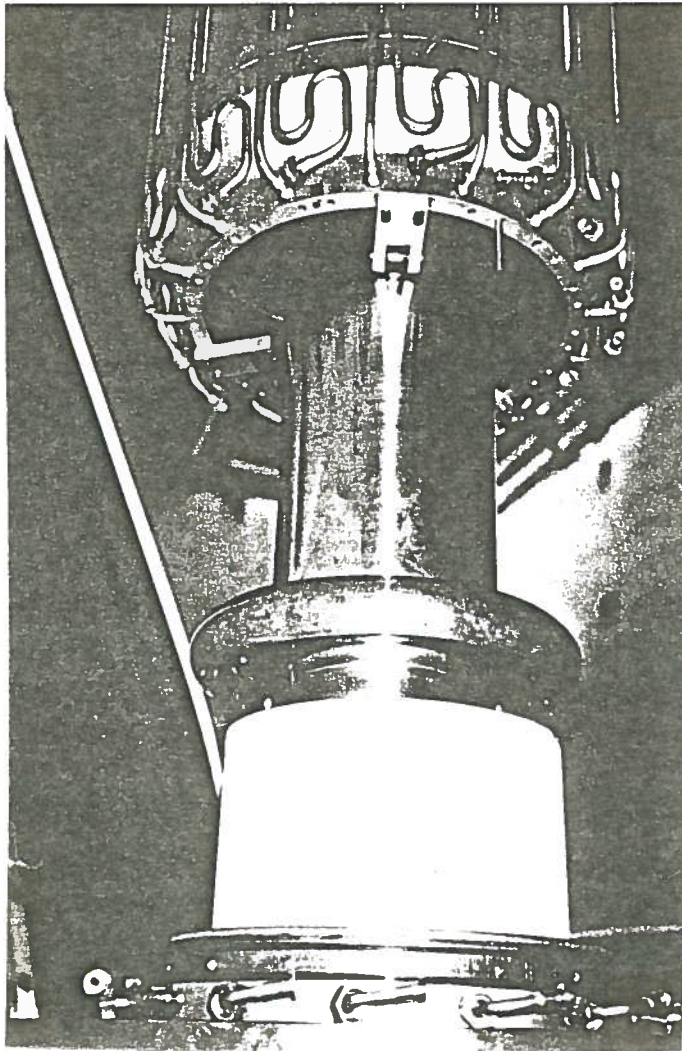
The upper coaxial during assembly. The alumina insulator supported by an air cushion is also shown.
